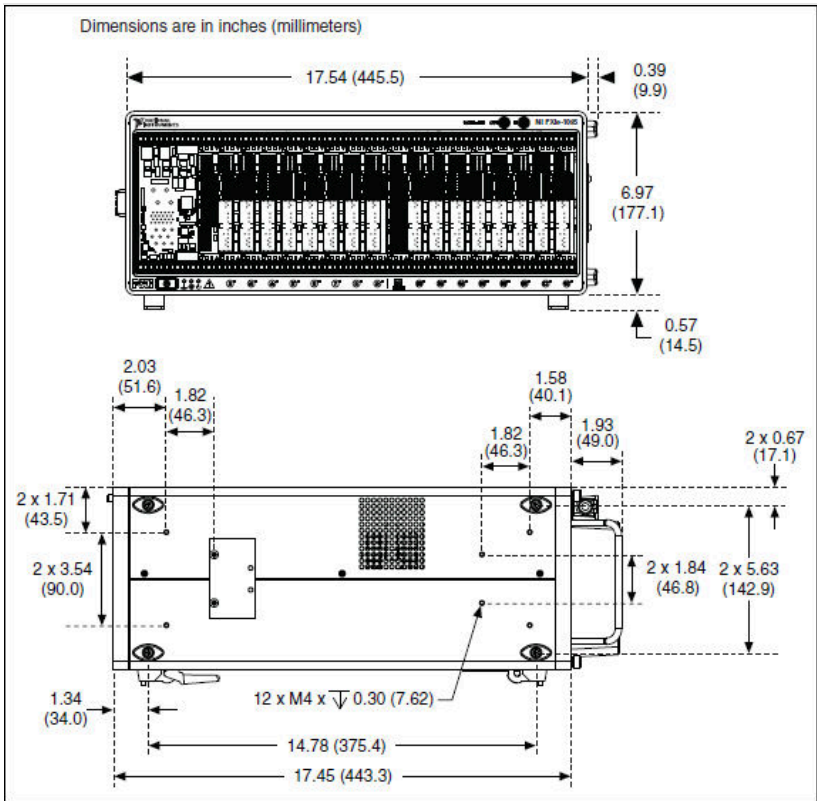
NI PXIe-1085 Chassis Dimensions (Front and Side)
